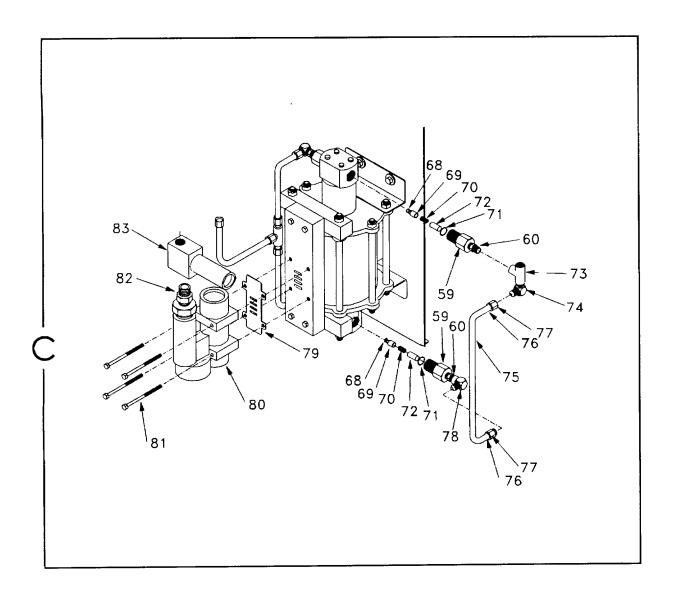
BOOSTER PANEL ASSEMBLY (PA004) (4 of 4)
